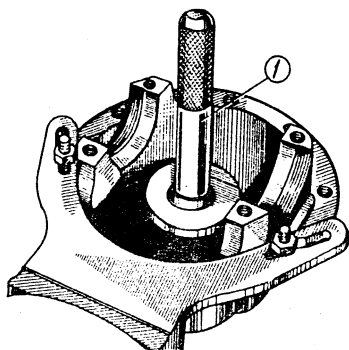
Installing the Drive Pinion Rear Bearing Outer Race:
